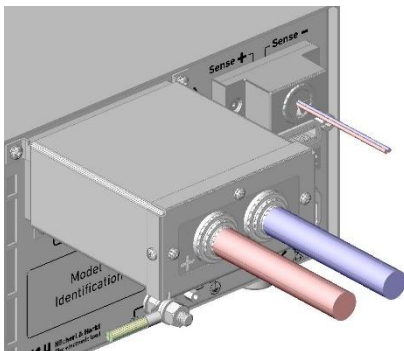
fully assembled SAB-HES-3/3S safety cover
